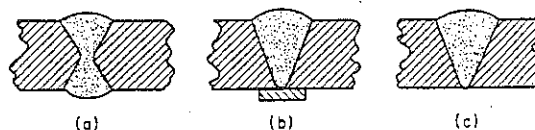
Weld types: (a) Double-welded butt joint, back-chipped before welding second side. (b) Single-welded butt joint, with backing strip which may or may not be removed. (c) Single-welded butt joint, no backing strip (permitted only for certain circumferential welds).
